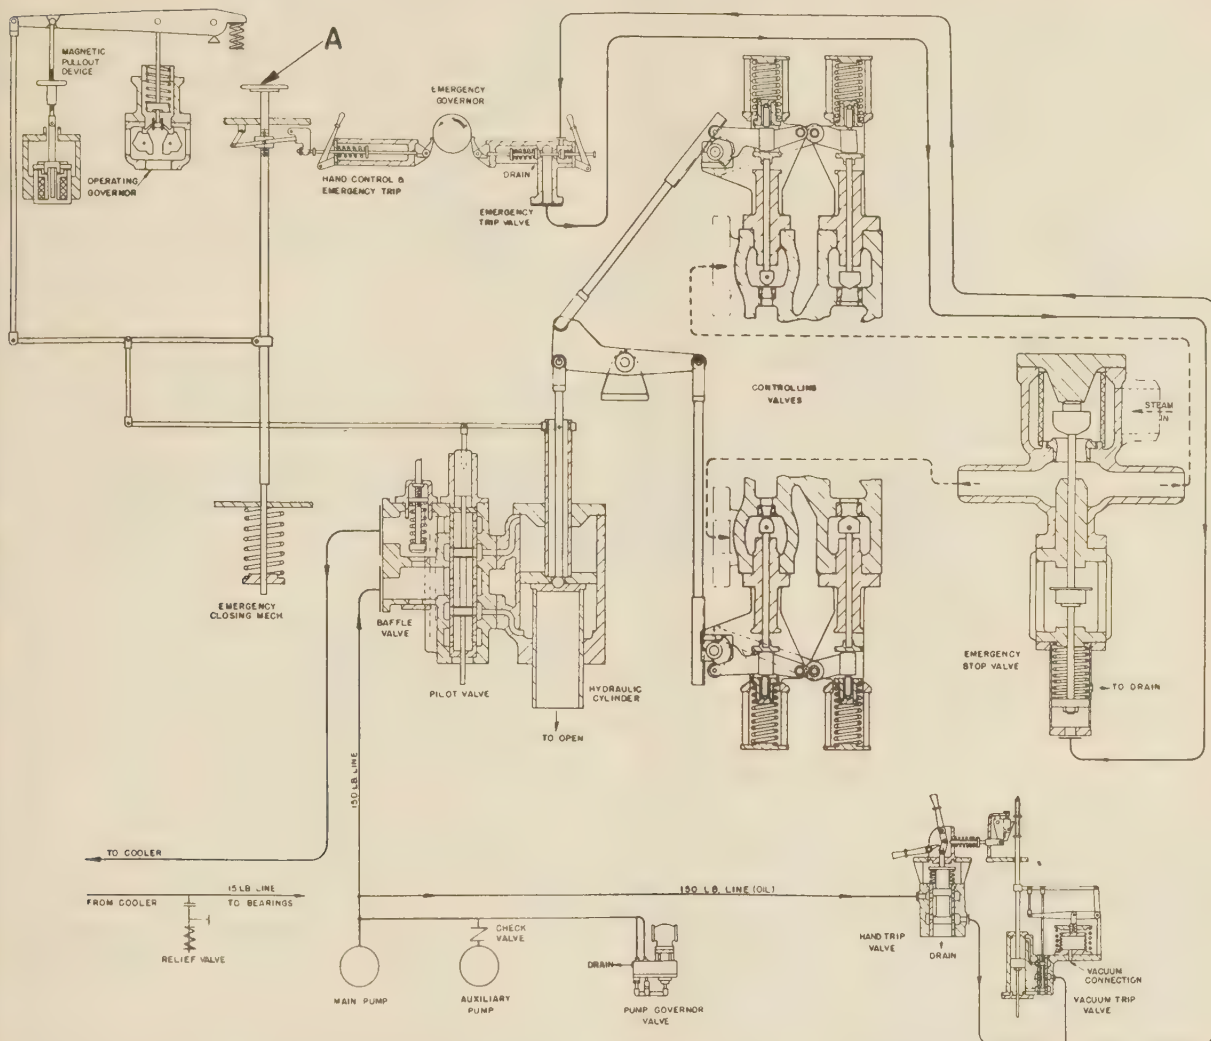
DIAGRAMMATIC SKETCH OF GOVERNOR MECHANISM SHOWING HANDWHEEL A FOR POSITIONING OF MAIN-CONTROL VALVE, "MAGNETIC PULL-OUT" FOR PERMITTING STABLE LIGHT LOAD OPERATION, AND "VACUUM TRIP" TO SHUT UNIT DOWN IN EVENT OF LOSS OF VACUUM
